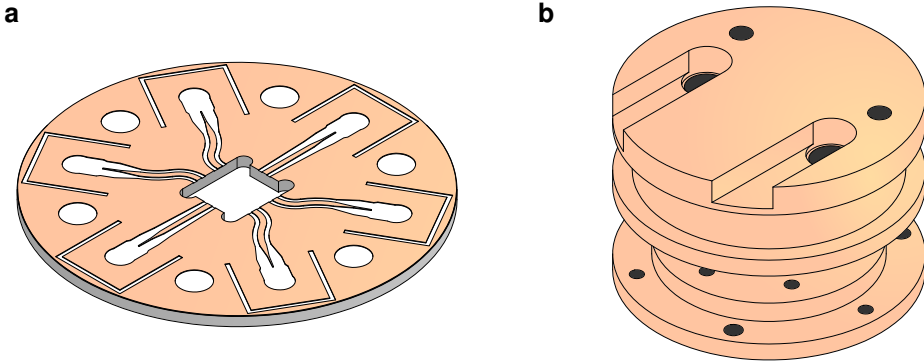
Design drawings of a, PCB and b, Sample holder box. The latter consists of two parts. A bottom plate, onto which the PCB is mounted, and a top part, which holds the microwave cables. When connected together, the interior is a closed cavity.
